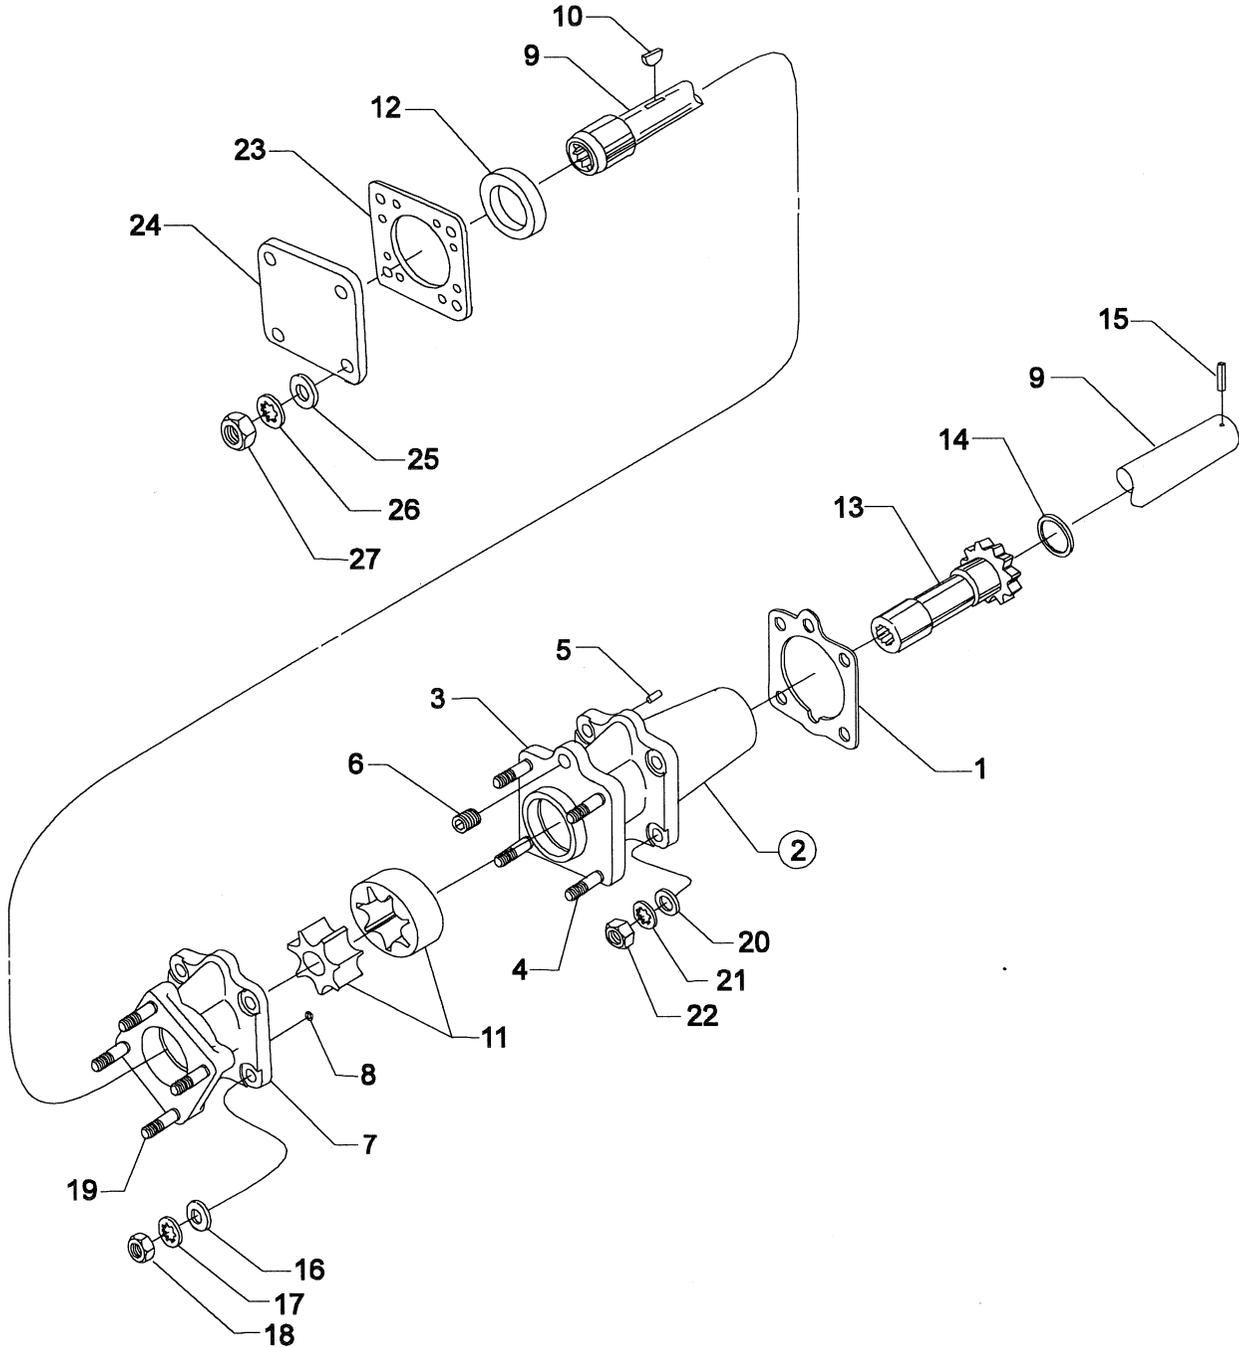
TURBO SCAVENGE PUMP AND HYDRAULIC PUMP DRIVE AND COVER
